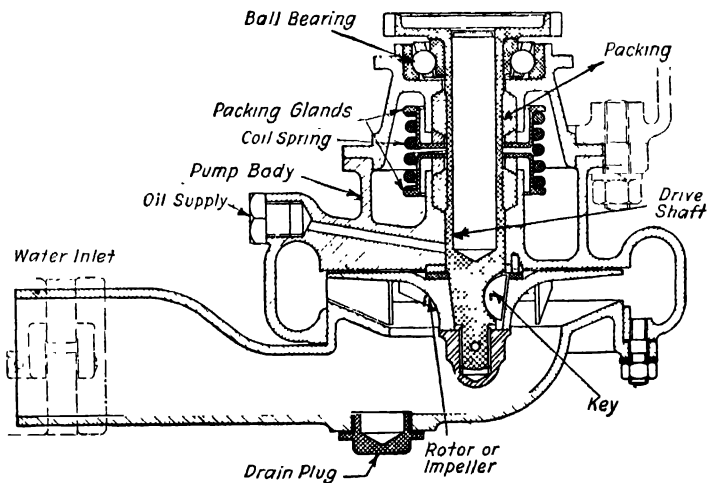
Sectional View of Fiat Water Circulating Pump with Spring to Keep Packing Glands Tight Automatically.
